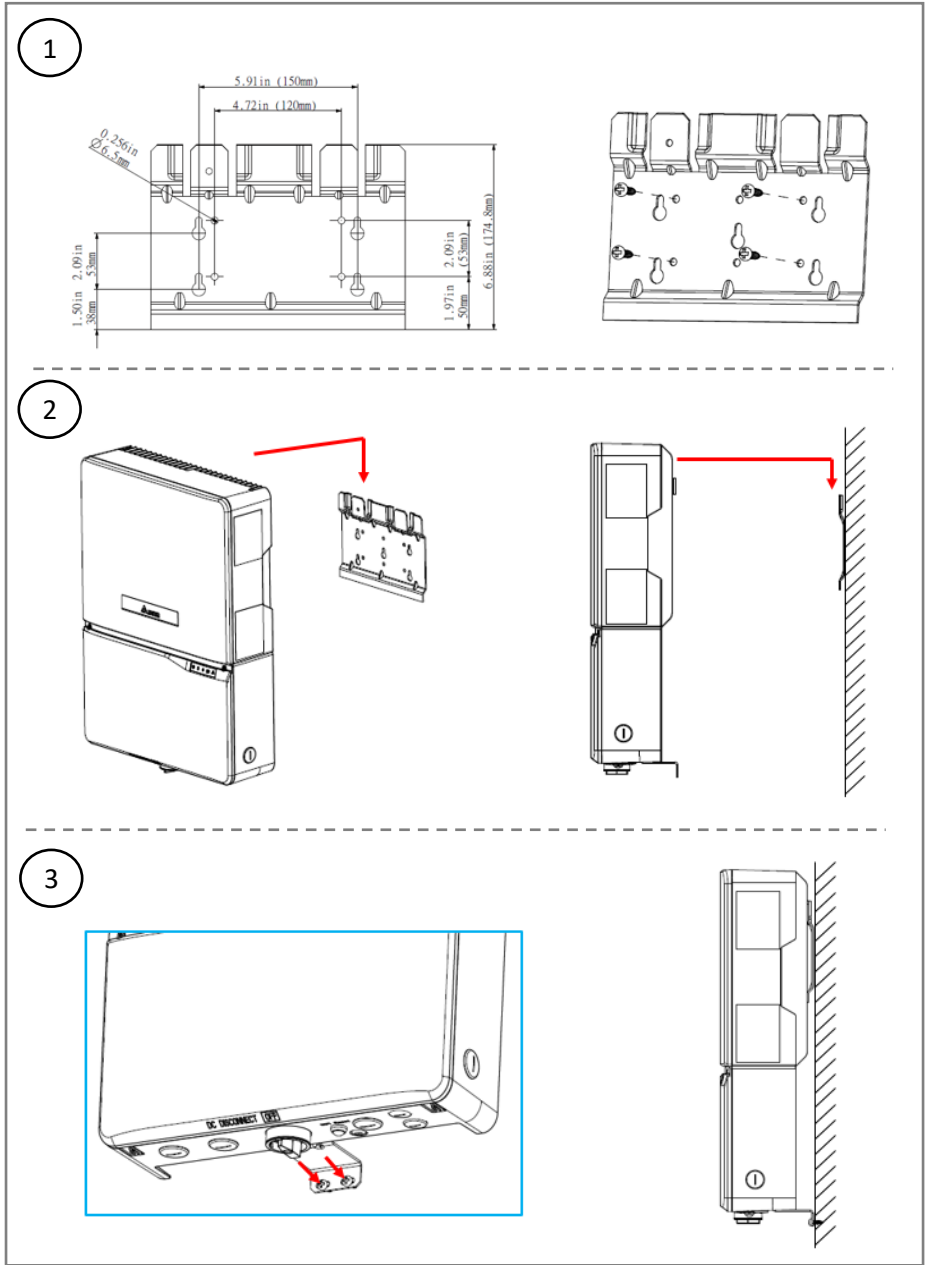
Attaching the mounting bracket for H8E / H10E
